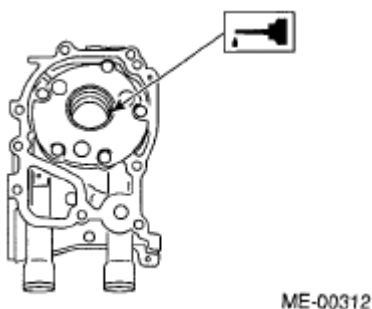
Applying Coat Of Engine Oil To Inside Of Oil Seal
